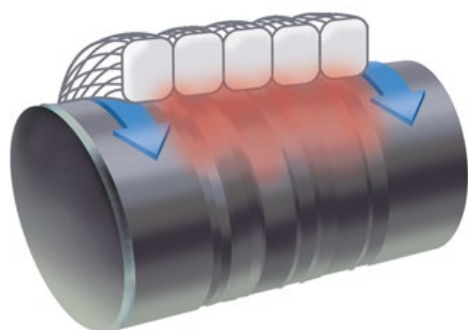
Standard packing – friction impacts both the packing and the shaft.
